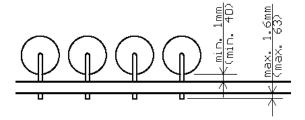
Minimum and maximum distances when soldering THT gate resistors (in mm/mil)
